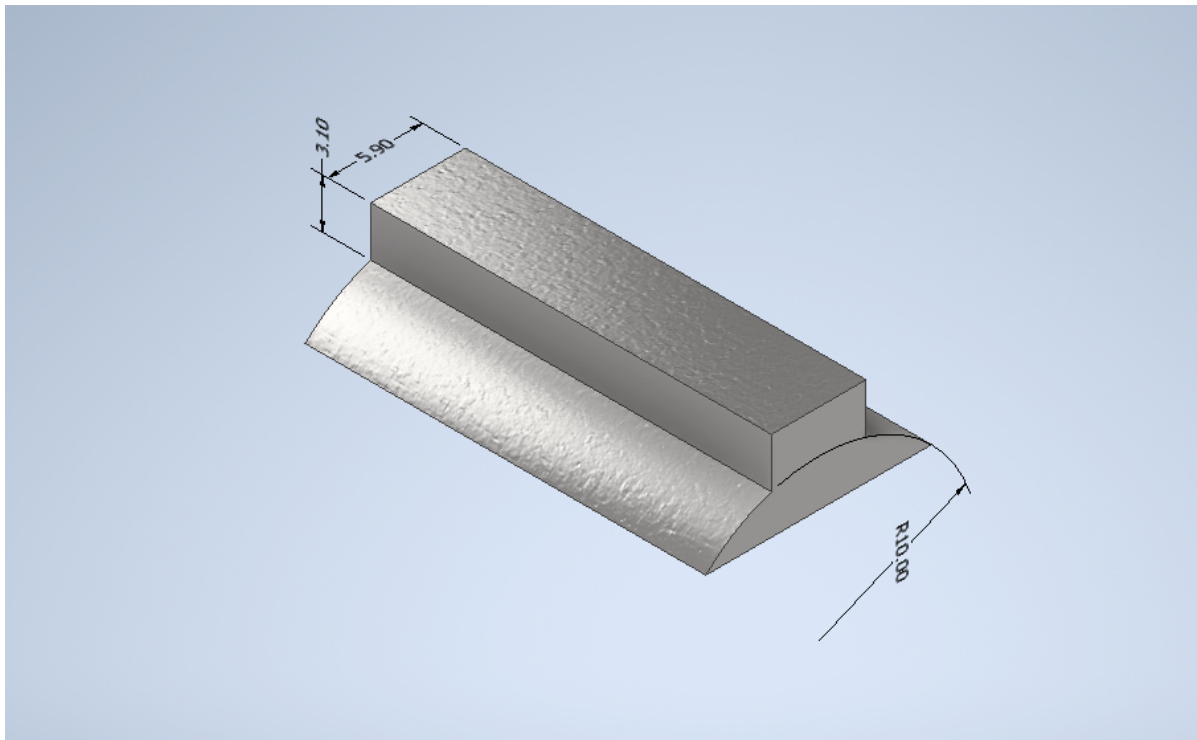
CAD image of key used to mechanically lock axles and gears. Key is press-fit into position.
